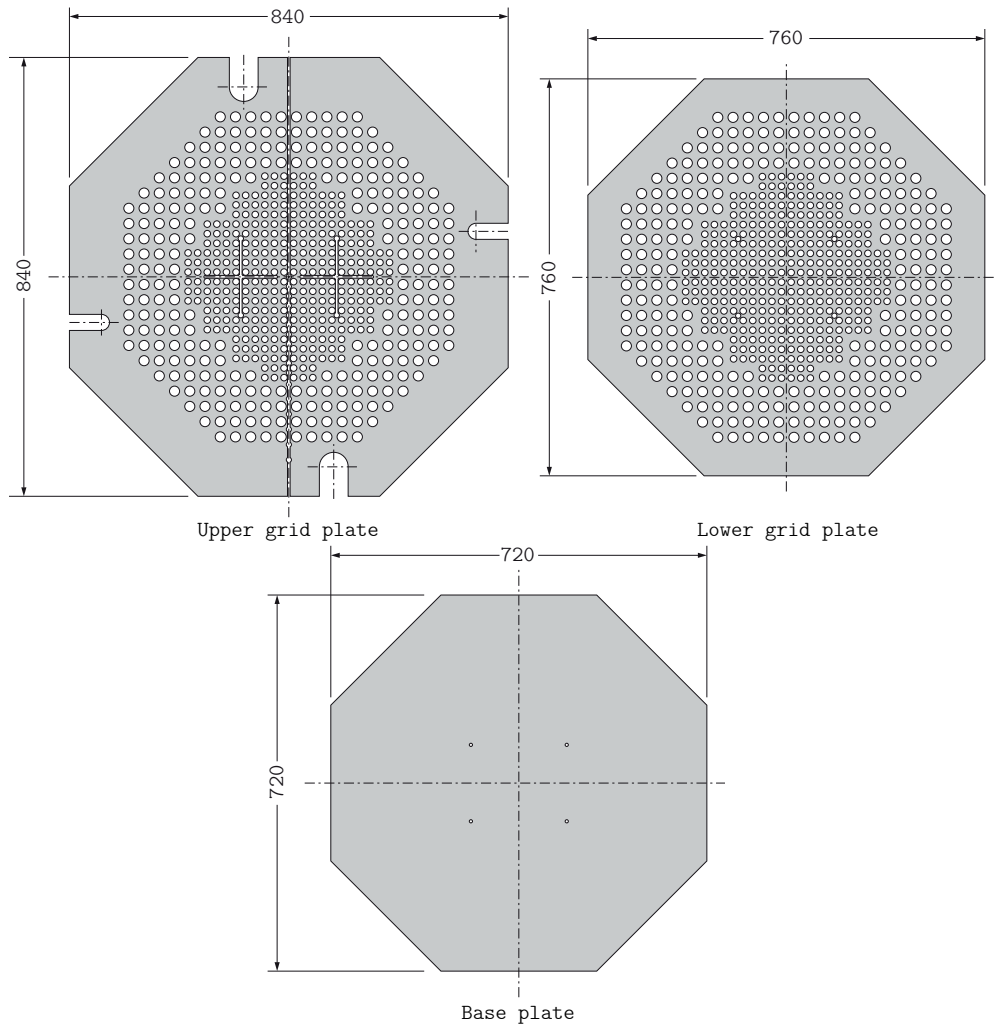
Top view of CROCUS grids and base plates. Dimensions in mm.
